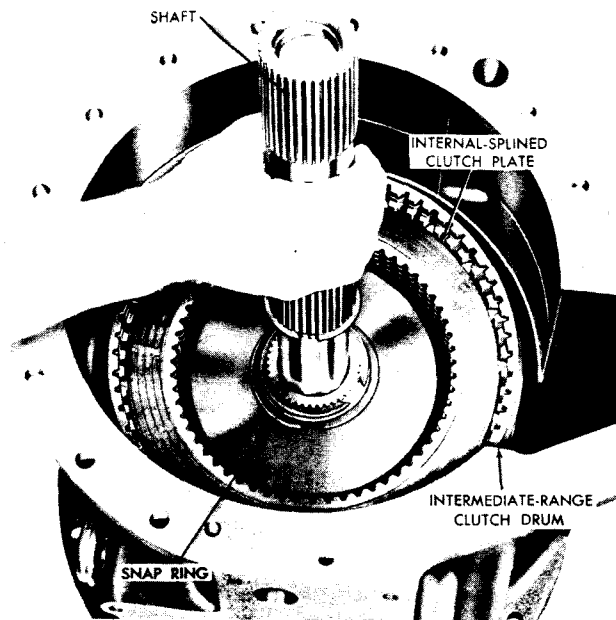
Installing (or removing) transmission main-shaft assembly ^{S2506}
